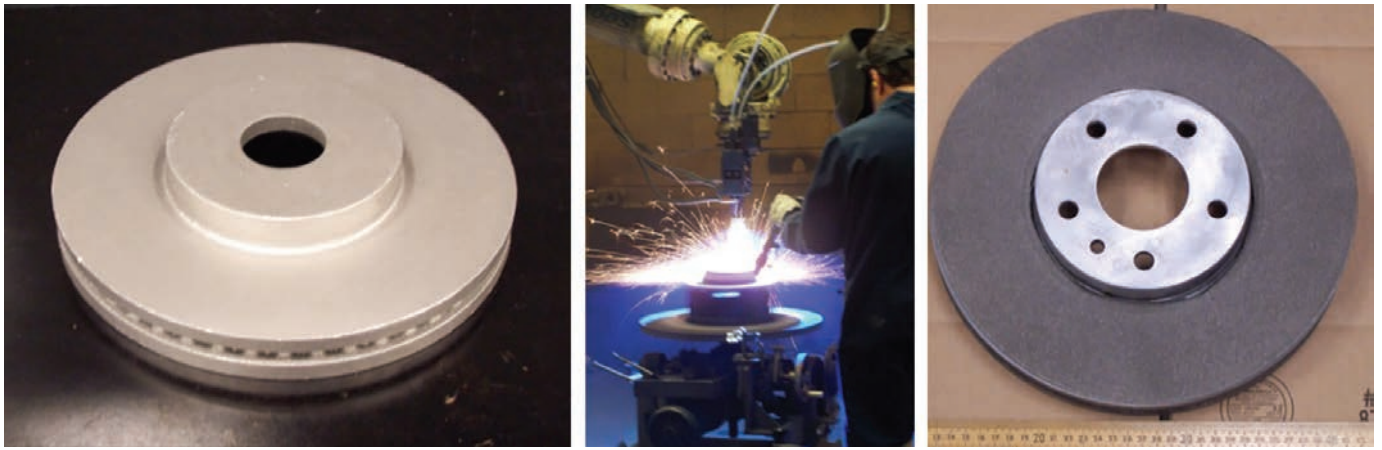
Cast aluminum front rotor, thermal spray process, and finished brake rotor.
